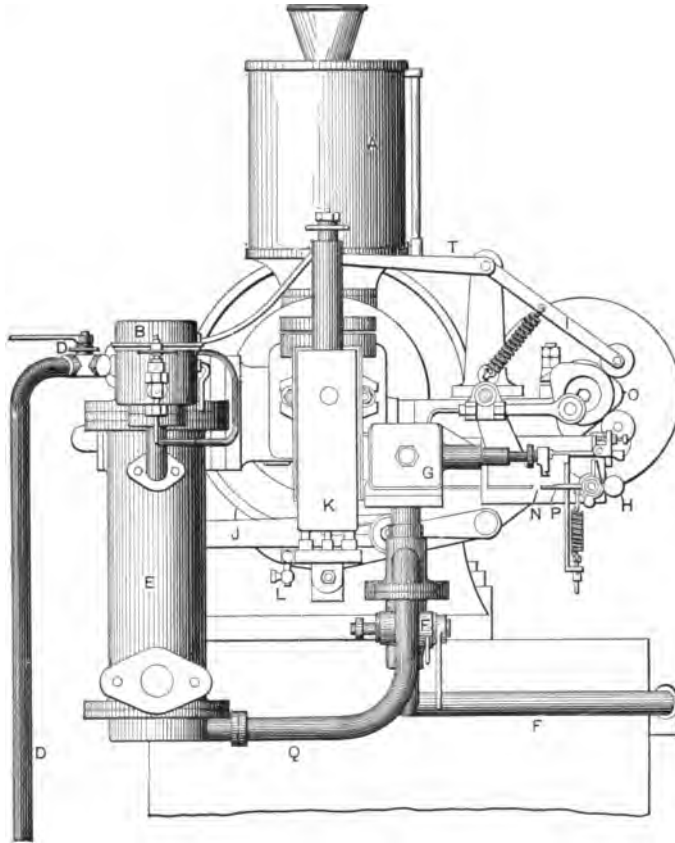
END VIEW OF "ROCKET" OIL ENGINE.
